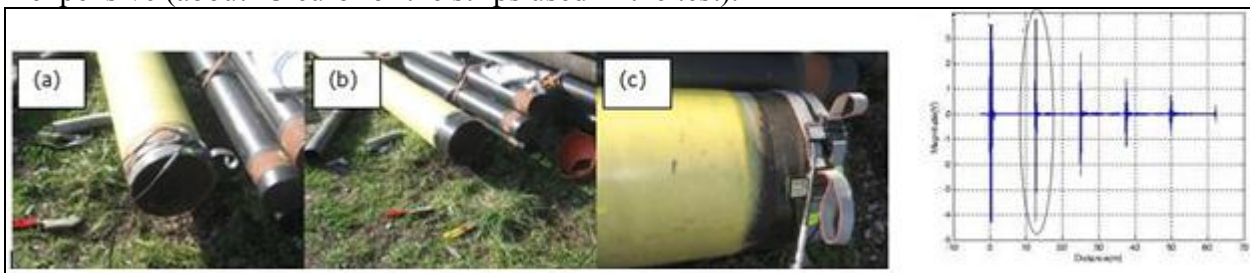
Test of PE coated pipelines: a) acquisition without the coating; (b) coating of the pipe; (c) acquisition with the coating between the strips and the coil; (d) results.
